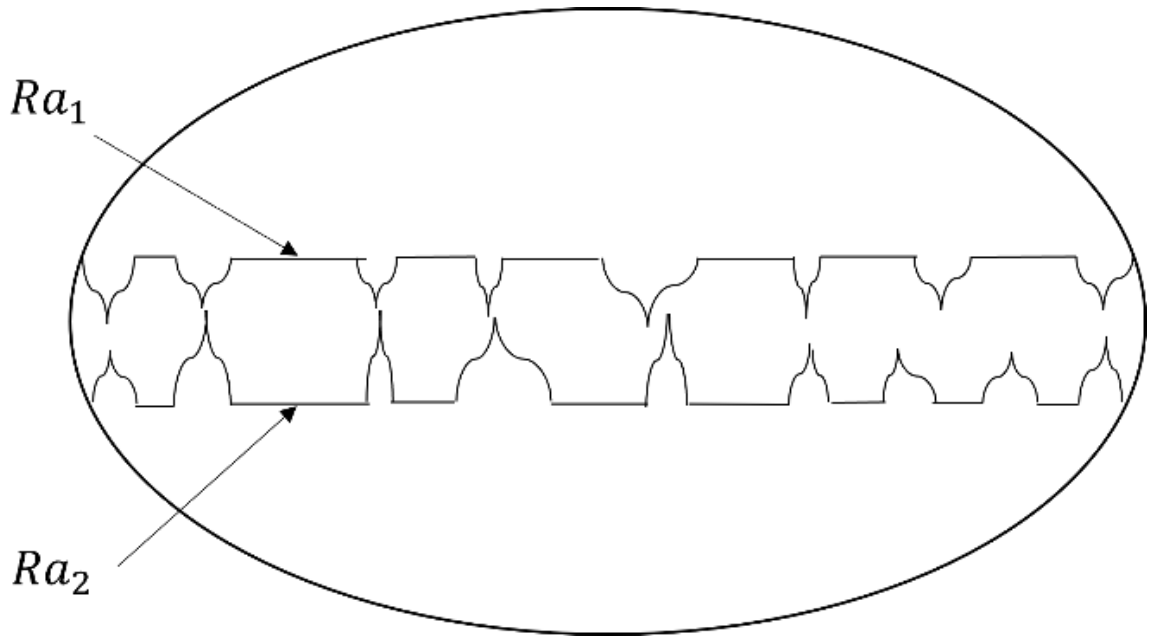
The schematic depiction of the enlarged welding surfaces
